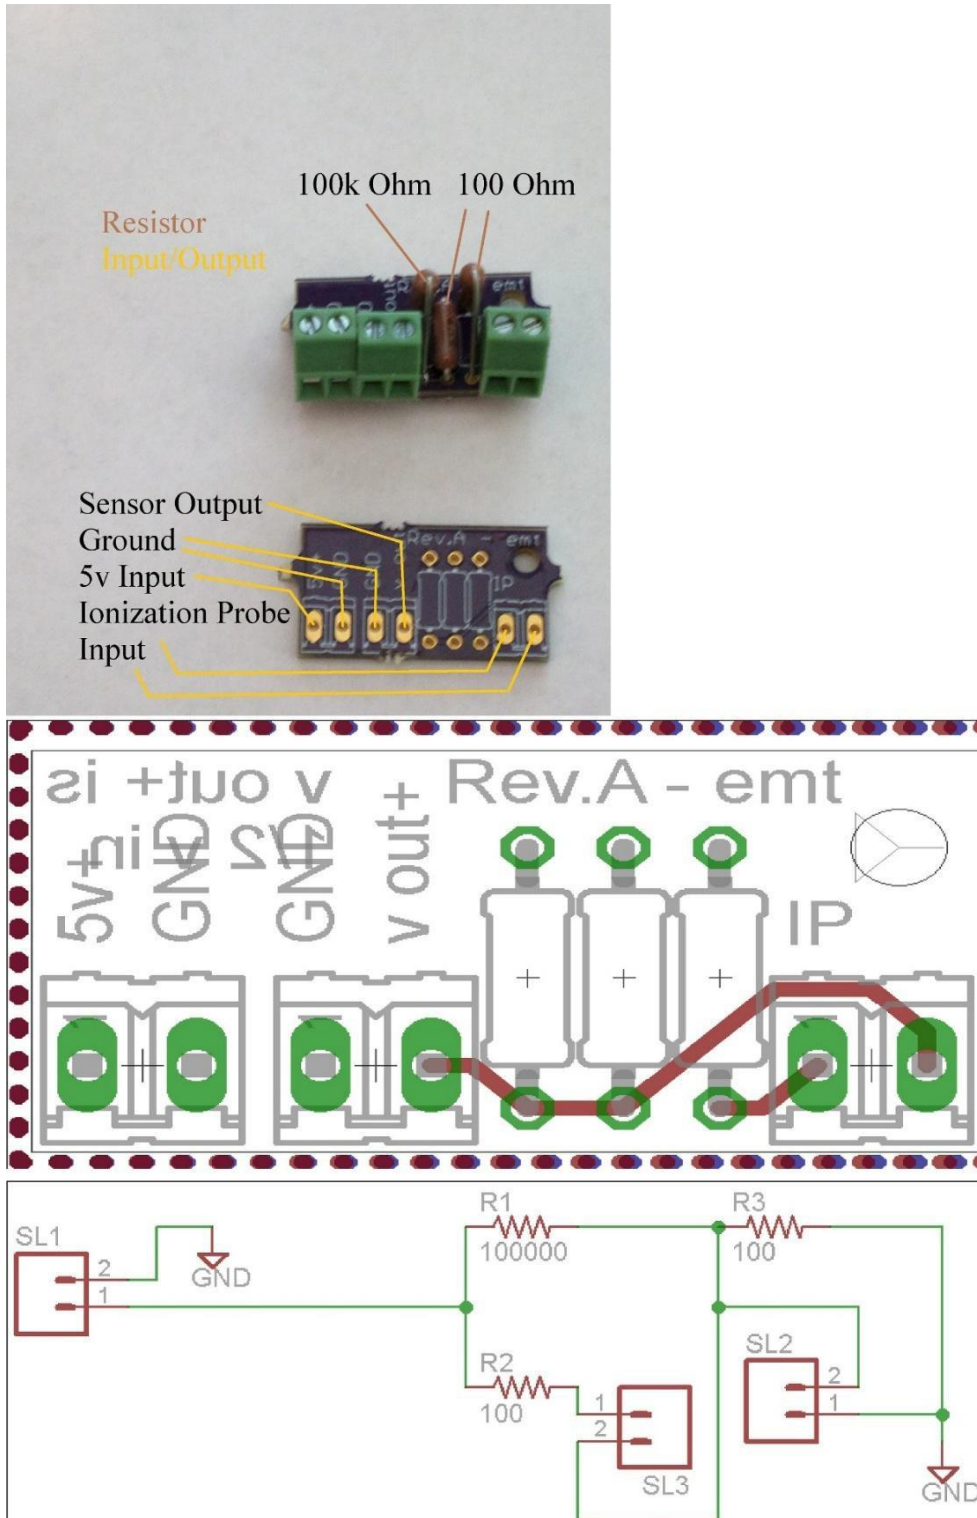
Ionization Probe circuit details. Populated board, bare board, board layout, and schematic.
